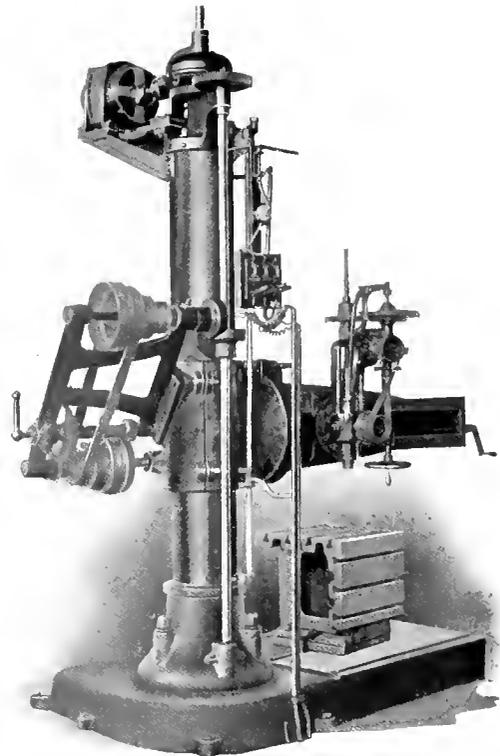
Induction Motor driving 4 1-2 ft. Universal Radial Drill
